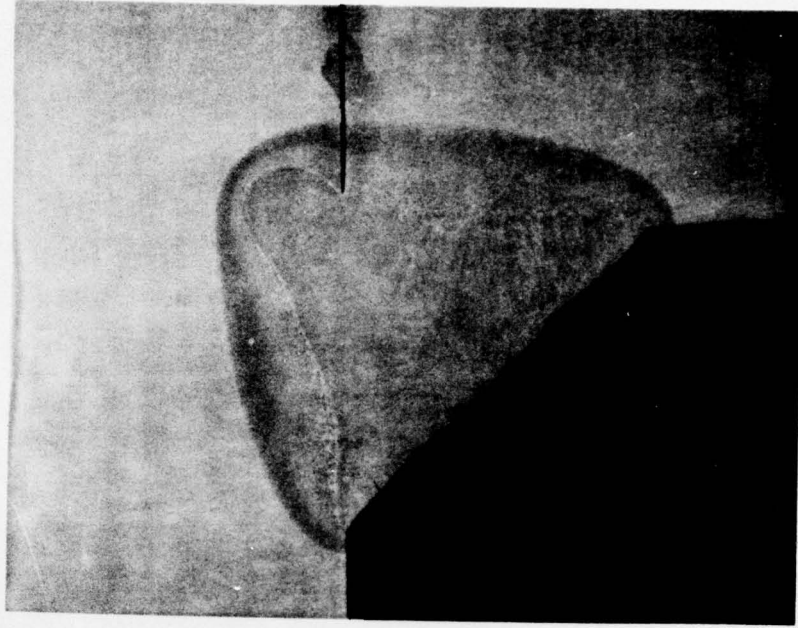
Macrograph of fillet weld, 4.7x.
